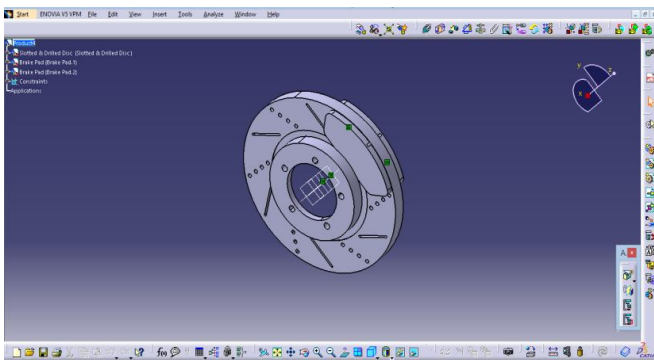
Combined Drilled and Slotted rotor with brake pad assembly CATIA model
